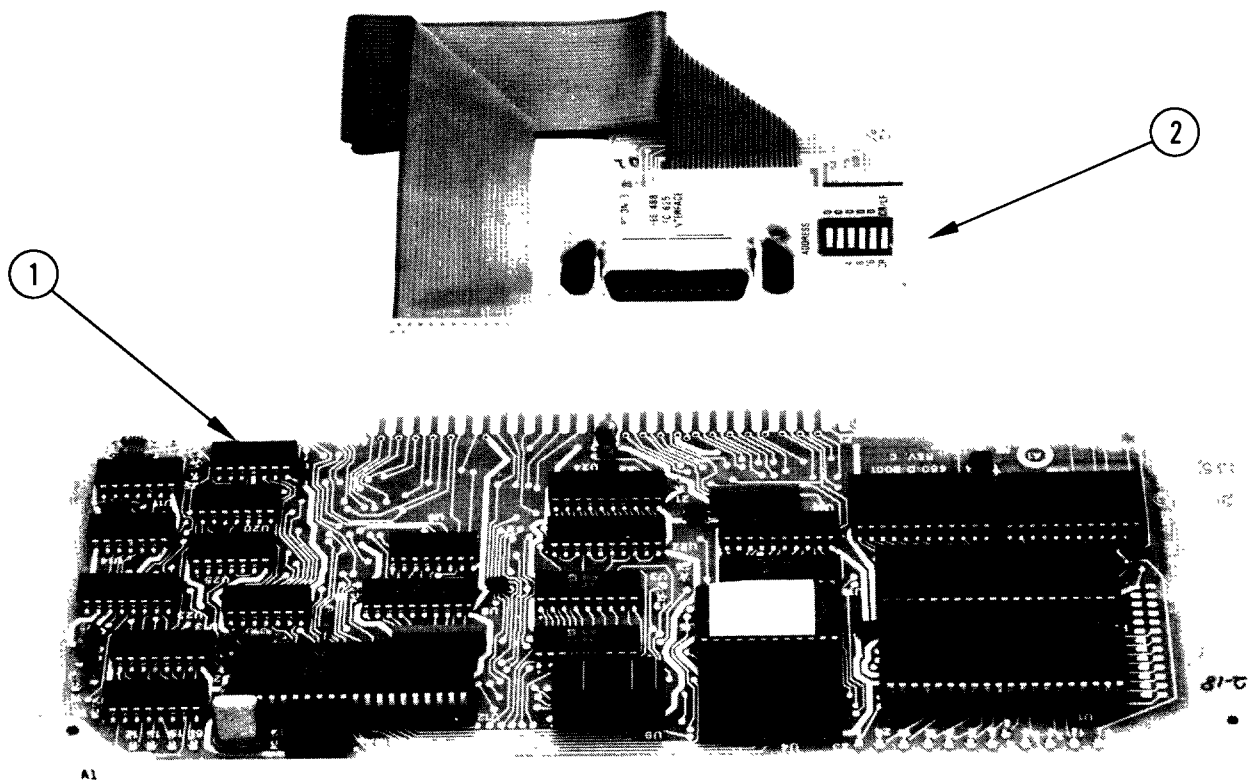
A16 Rear Panel Assembly, Dwg. 660-D-8016
